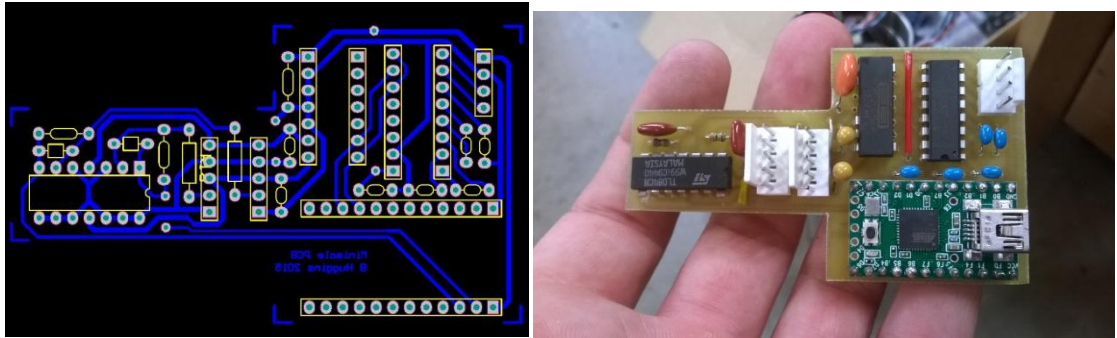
Minimole PCB, Altium design (left), finished fabrication (right)
